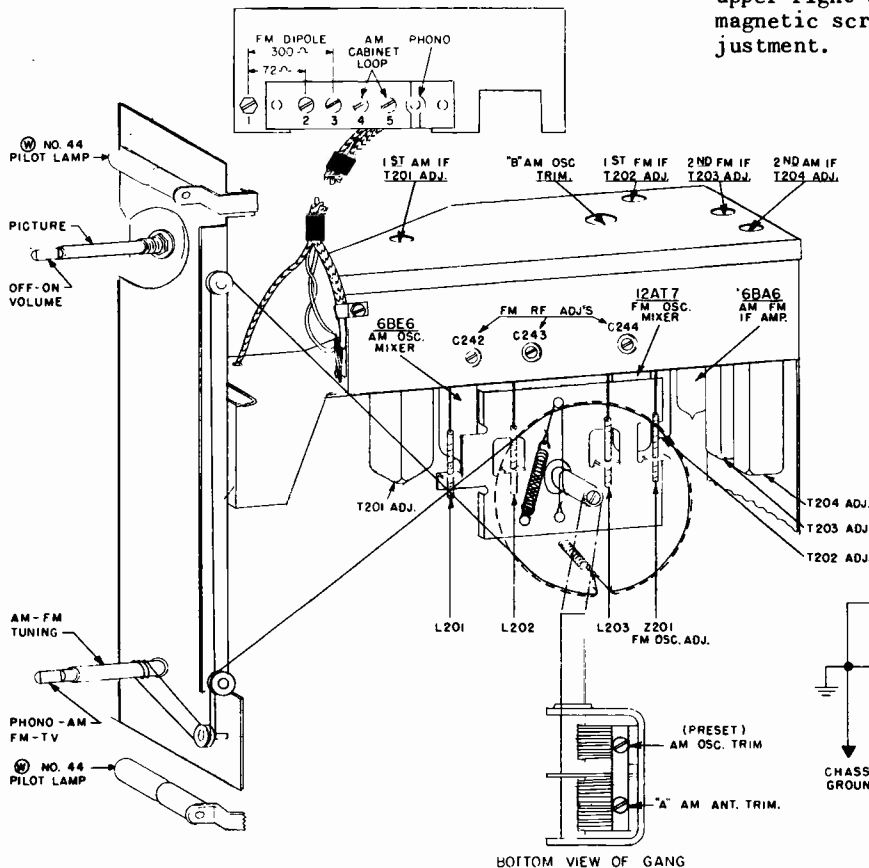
V-2163-1 CHASSIS ADJUSTMENTS AND DRIVE STRINGING
